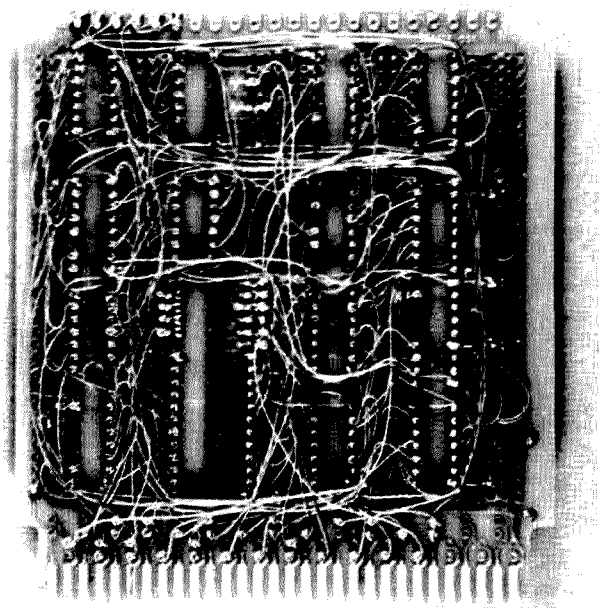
Photo B. Typical wire-wrapped circuit board. This board is of “universal type” with printed circuitry on opposite side.
